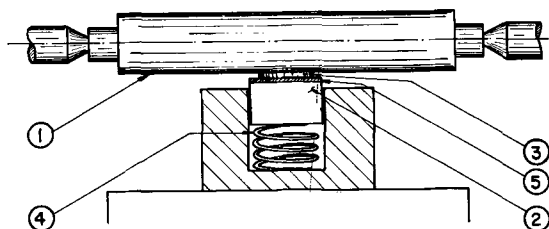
Grooving apparatus: 1, grooving cylinder; 2, mounting block; 3, silicon slice; 4, spring; 5, glass cover plate.
